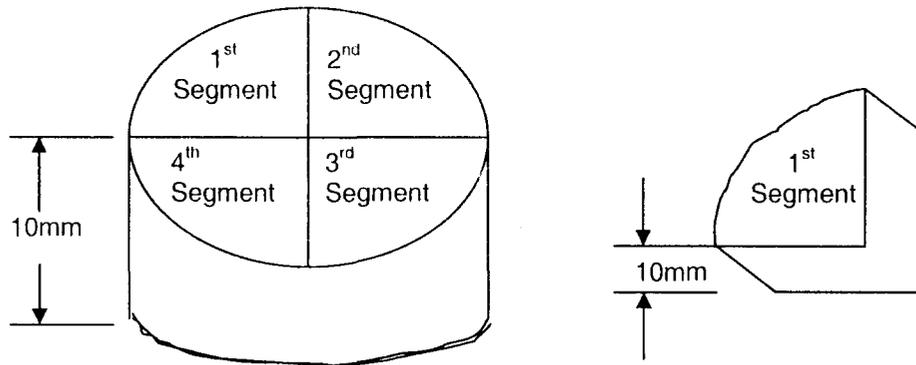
The shape of the chips produced by slicing and dicing action of the machine
